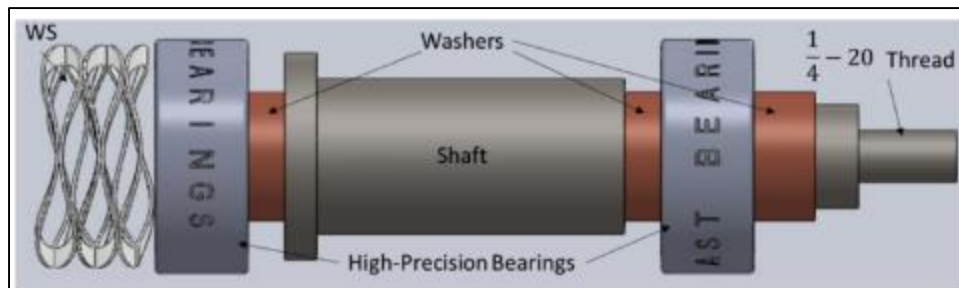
Bearing shaft assembly for each arm, first measuring instrument design
